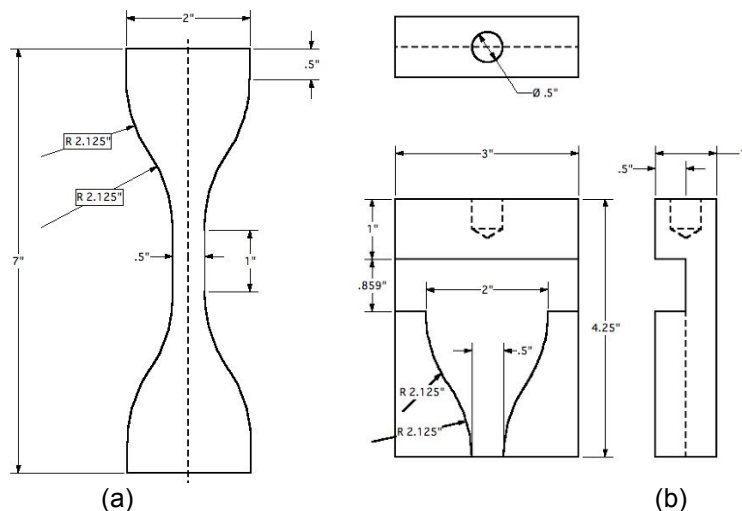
Schematic Drawing of the Ballistic Gelatin (a) Specimen Geometry and (b) Tensile/Fracture Gripping Fixture
